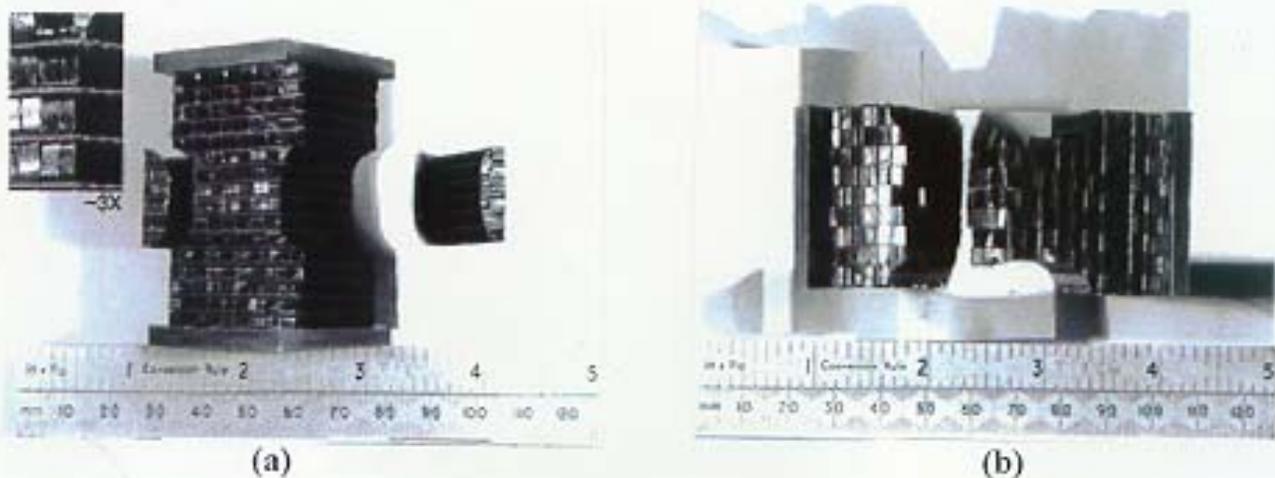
Samples of a brazed plate/fin structure for mechanical testing after electroerosion cutting (a) and after failure under tensile mode testing at 650°C.
